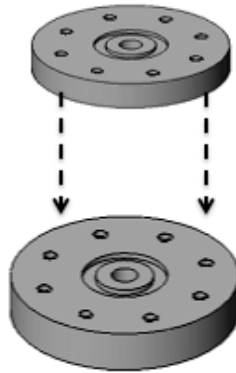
Illustration of a simple test base adapter for smaller substrates. Screw holes would remain in the same location, but the gas port and o-ring would be sized for the smaller substrate and the overall dimension would be slightly smaller.
